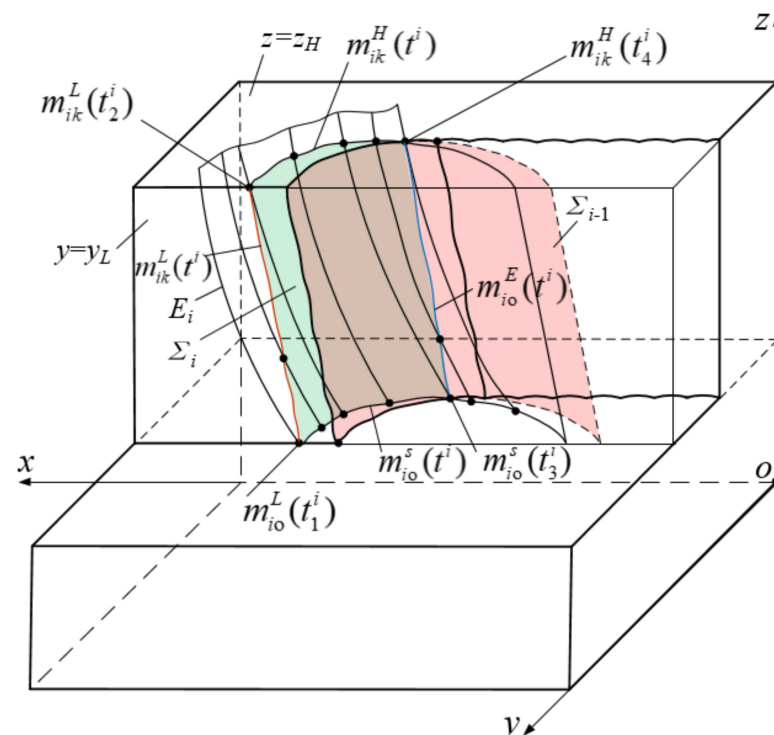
Instantaneous engagement between the cutting edge and the workpiece.
